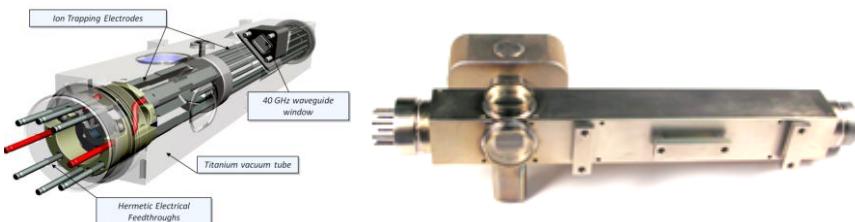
Ion trap/ vacuum tube assembly engineered following space vacuum tube design principles and bake-able to 450 C.
